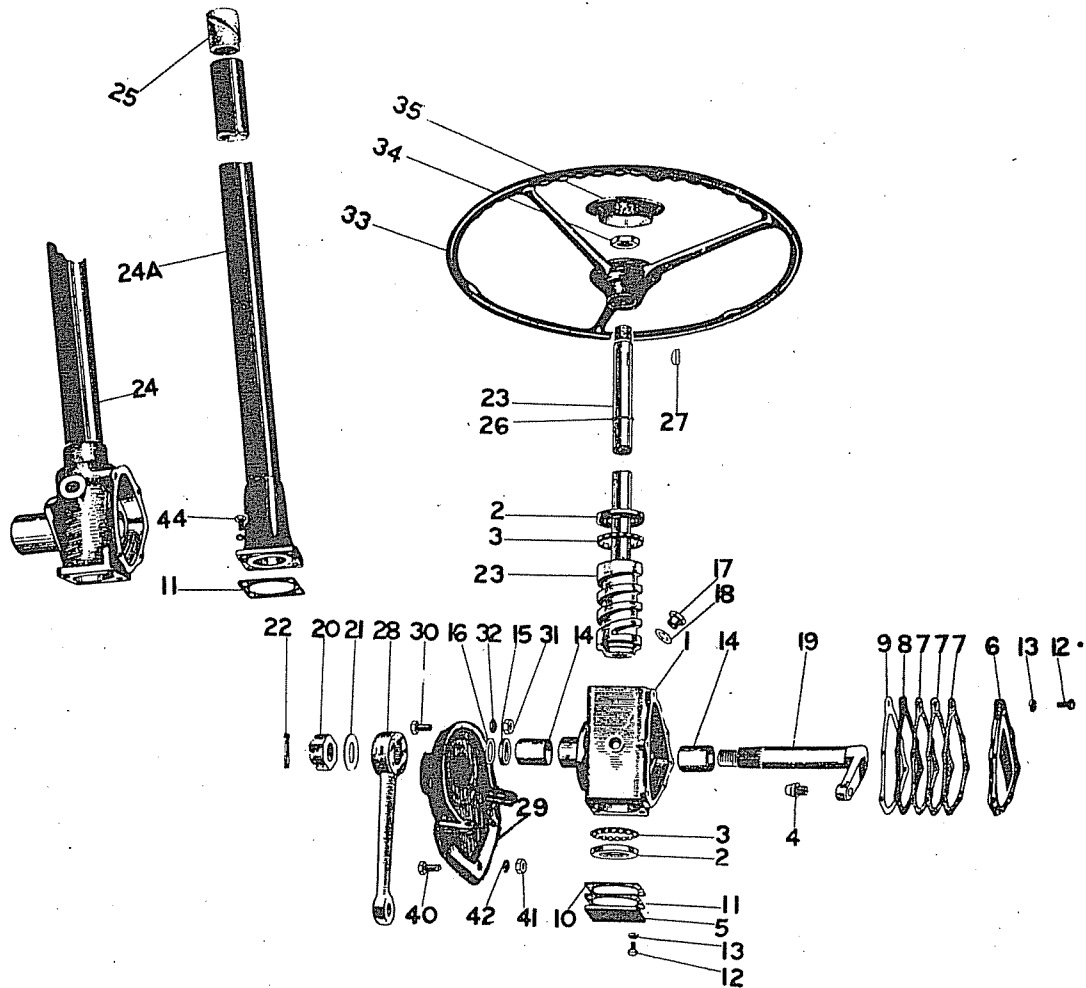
Typical Steering Gear Cam and Lever Type. Models 3-59A.
